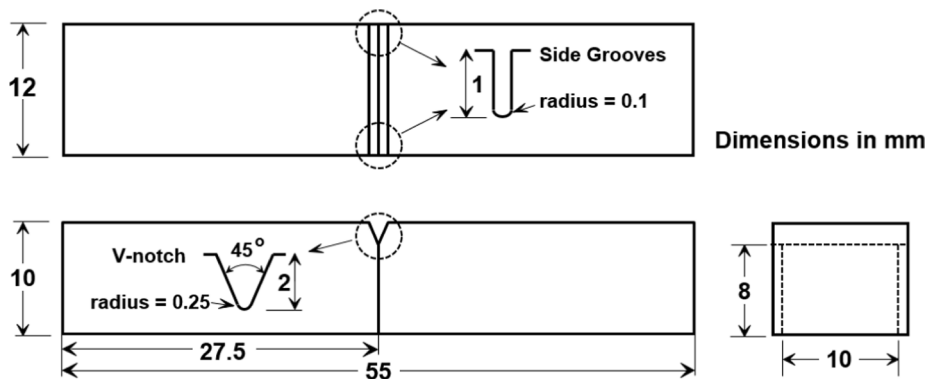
Geometry of the side-grooved modified Charpy V-notch (CVN-mod) sample, all dimensions in mm [10,11]. Side-groove tolerances: length to edge angle $90^\circ \pm 2^\circ$, alignment with the V-notch ± 0.025 mm, depth ± 0.025 mm, and root radius ± 0.025 mm.
